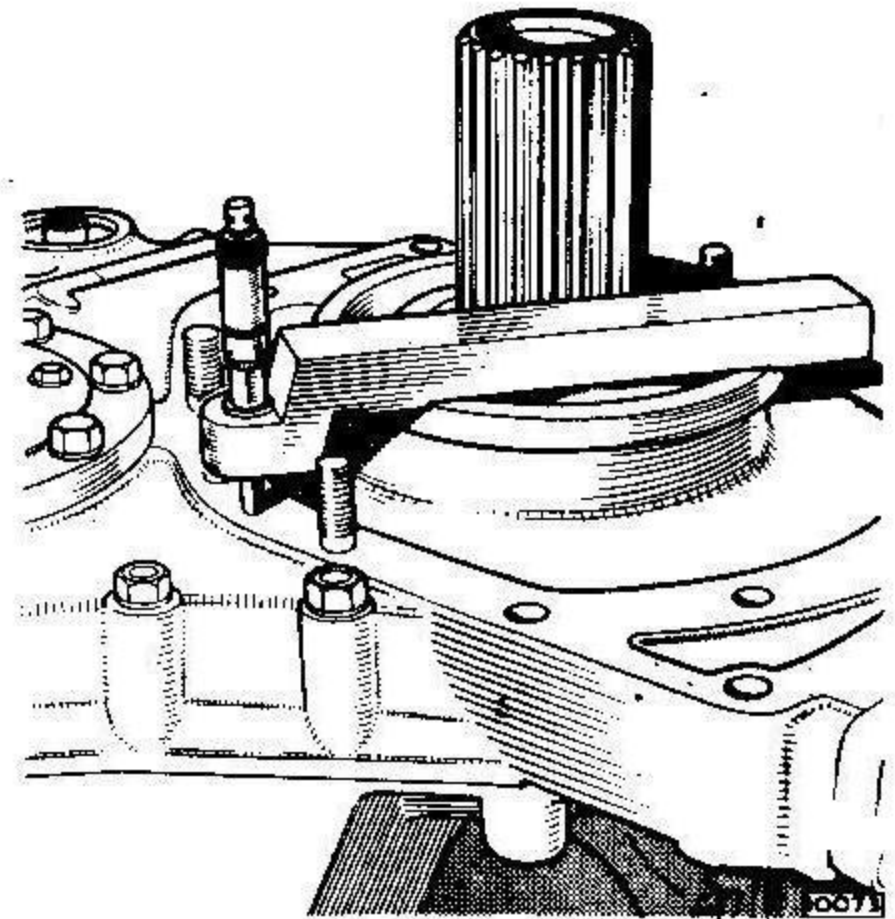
Checking the distance between the gearbox flange face and the outer race of the brake drum bearing
